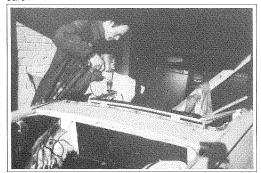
Turning now to the inside of the car, convertible rear seat backs are fixed by clips and pop rivets. Drill out...
